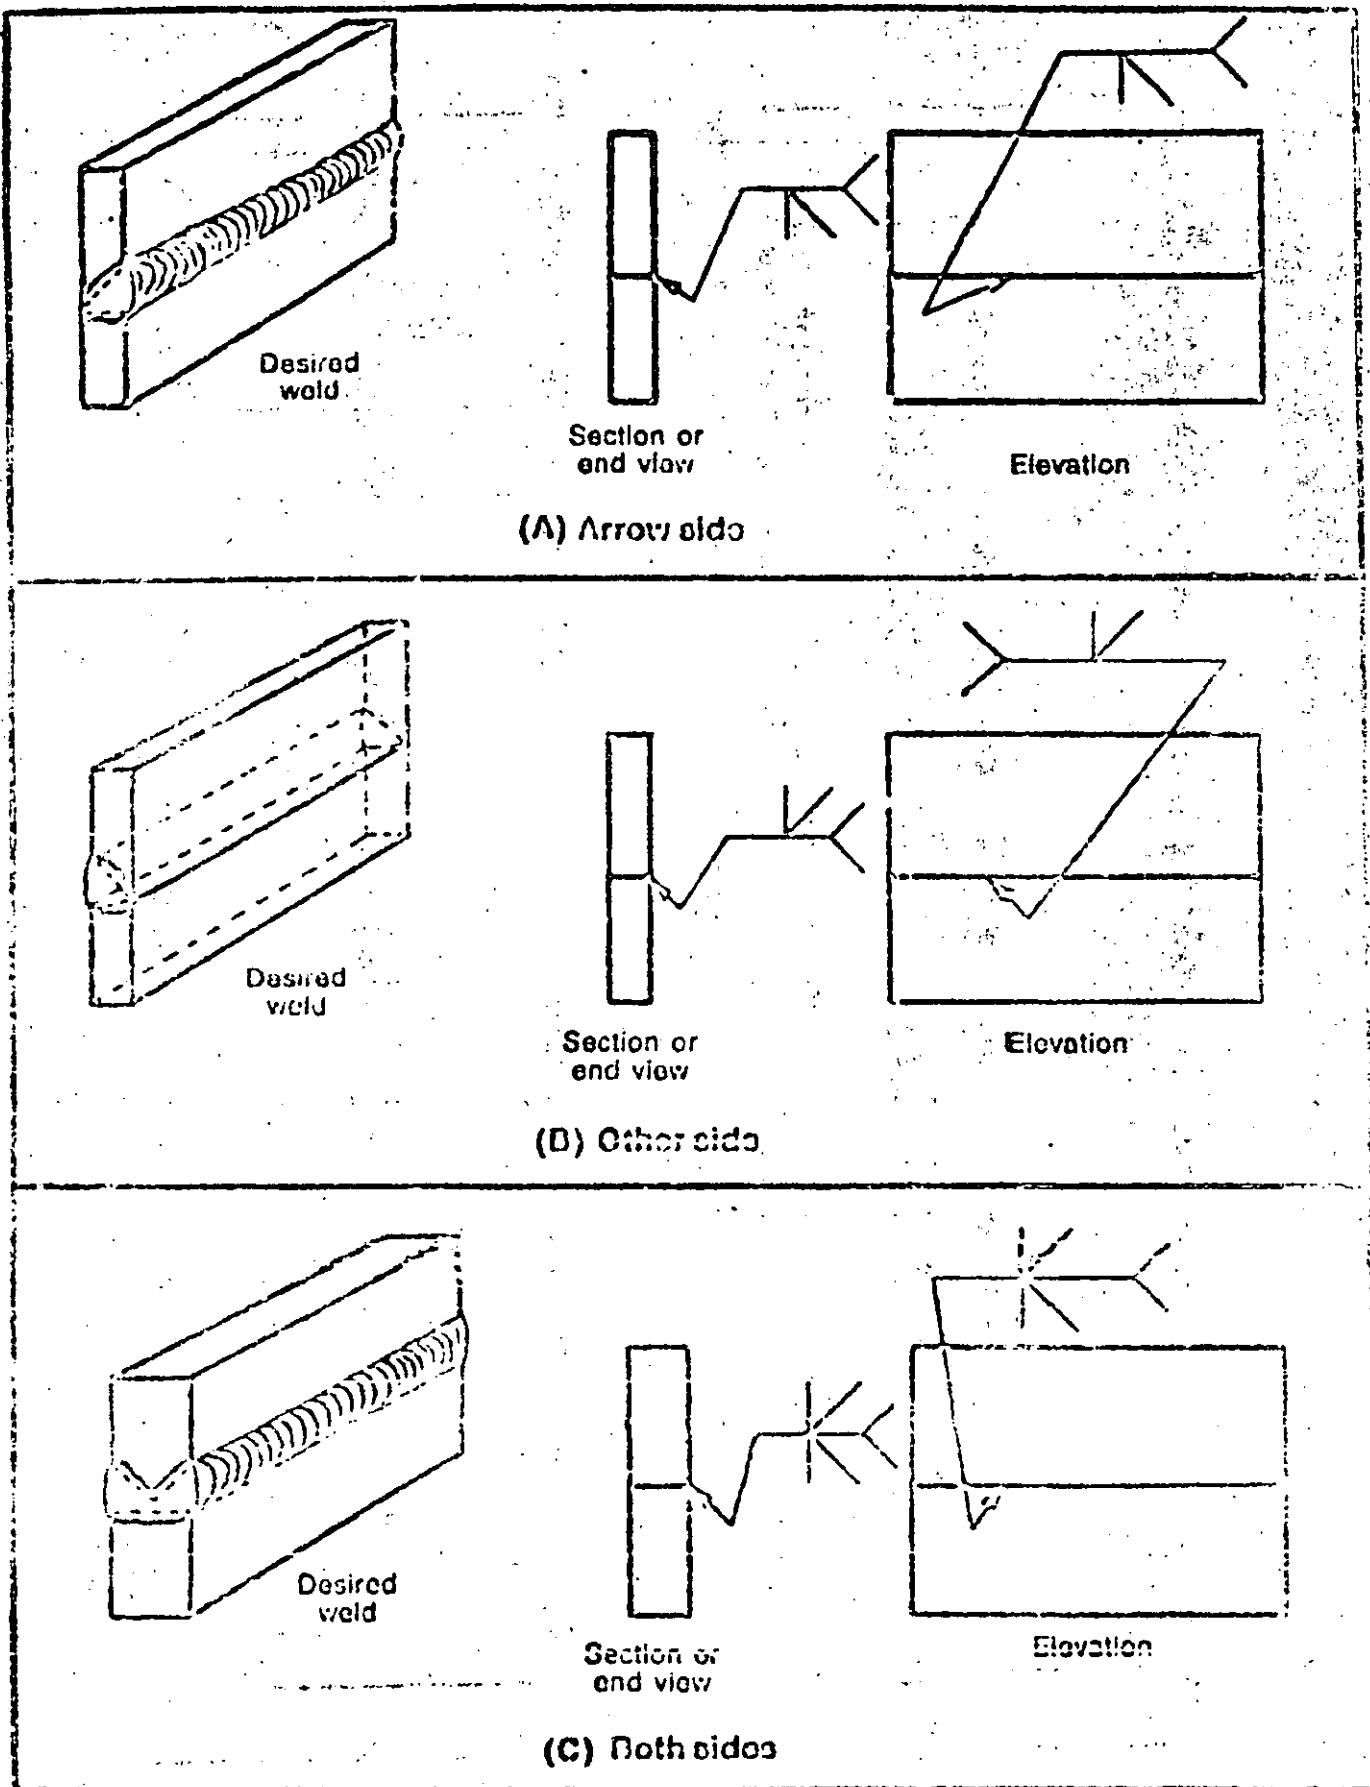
Application of break in arrow of welding symbol (bevel-groove weld).
